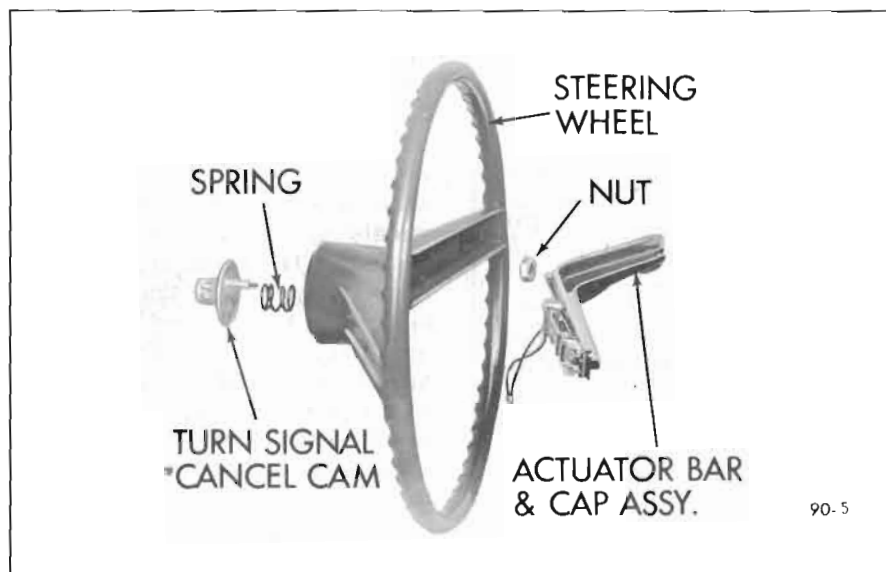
Deluxe Steering Wheel Installation (Non-Tilt Column)
